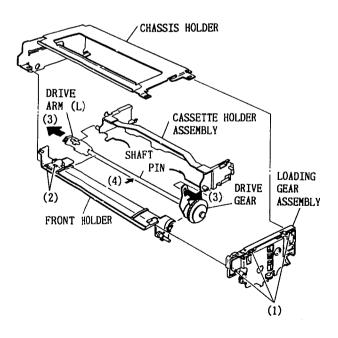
Loading Gear Assembly, Chassis Holder, Cassette Holder Assembly and Front Holder
